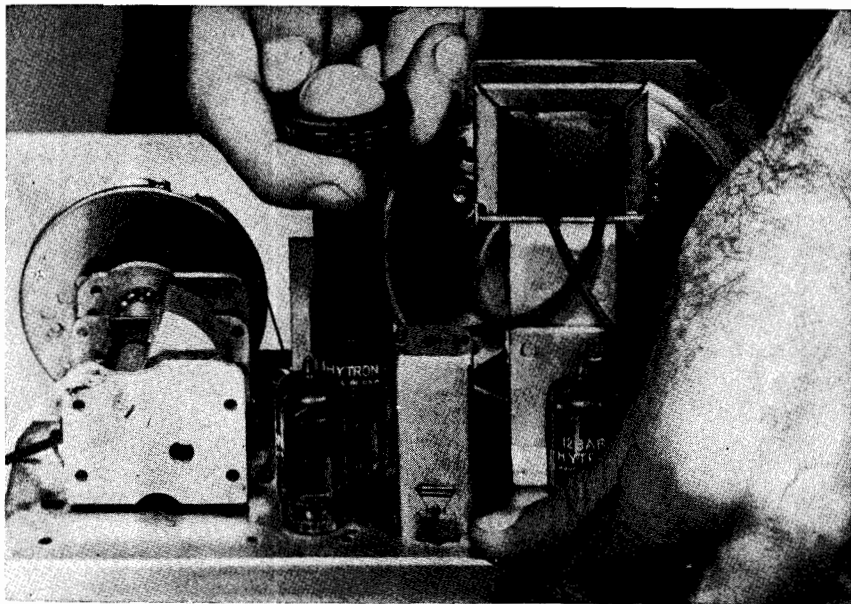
Handy tube puller for miniature tubes, made from special rubber that resists tube heat and provides both suction and friction for gripping glass envelope. (Hytron photo)
